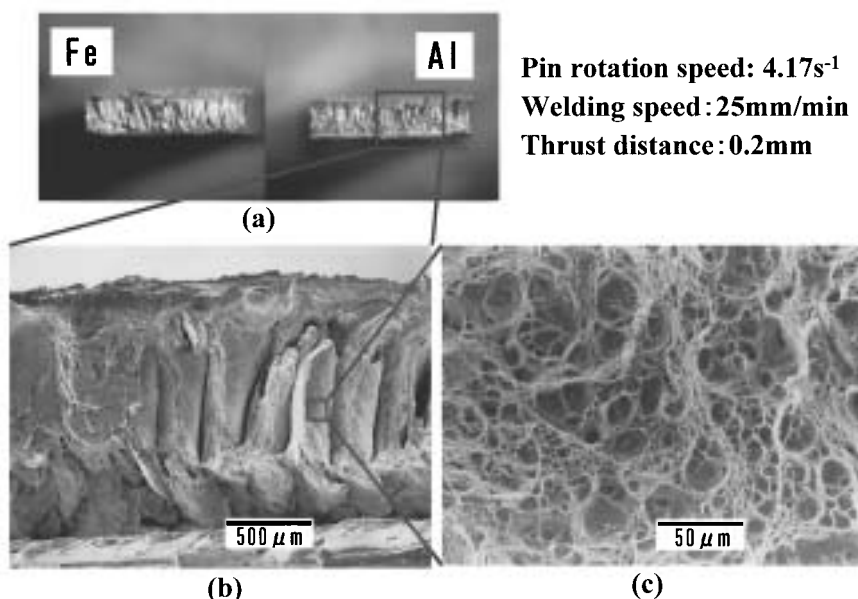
Fracture surface of the weld under the optimal welding conditions : (a) Macro-photo of fracture surface, (b) SEM image of fracture surface and (c) enlarged SEM image of (b). Fracture seems to occur along the interface between steel fragments and aluminum matrix, and dimple pattern is observed in the fracture surface.
